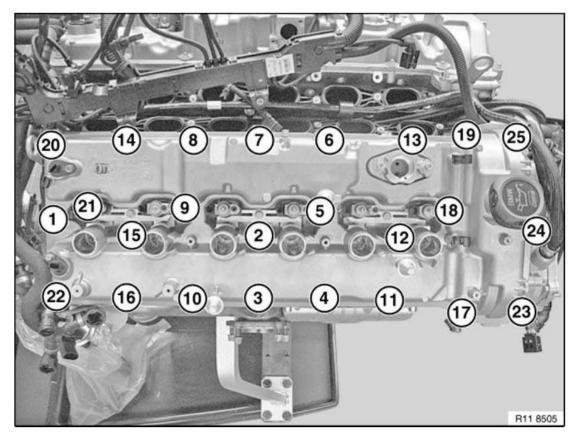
Identifying Cylinder Head Cover Bolts Releasing Sequence
